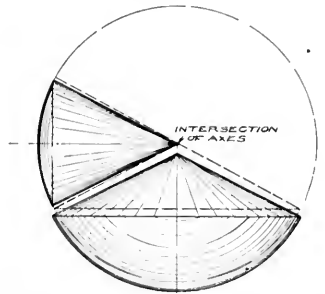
EFFECT OF AXIAL ADJUSTMENT OF THE PITCH CONES OF A PAIR OF BEVEL GEARS
